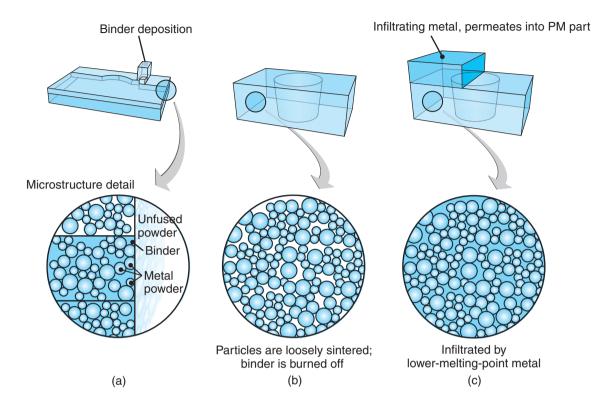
Three-dimensional printing using (a) part-build, (b) sinter, and (c) infiltration steps to produce metal parts. *Source:* Courtesy of Kennametal Extrude Hone.
